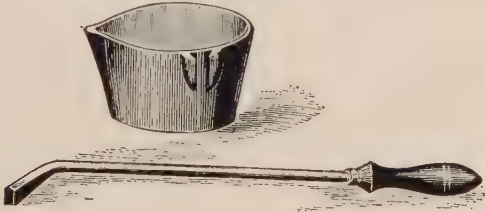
Ladle with detachable handle, used in melting Babbitt metal for die.
